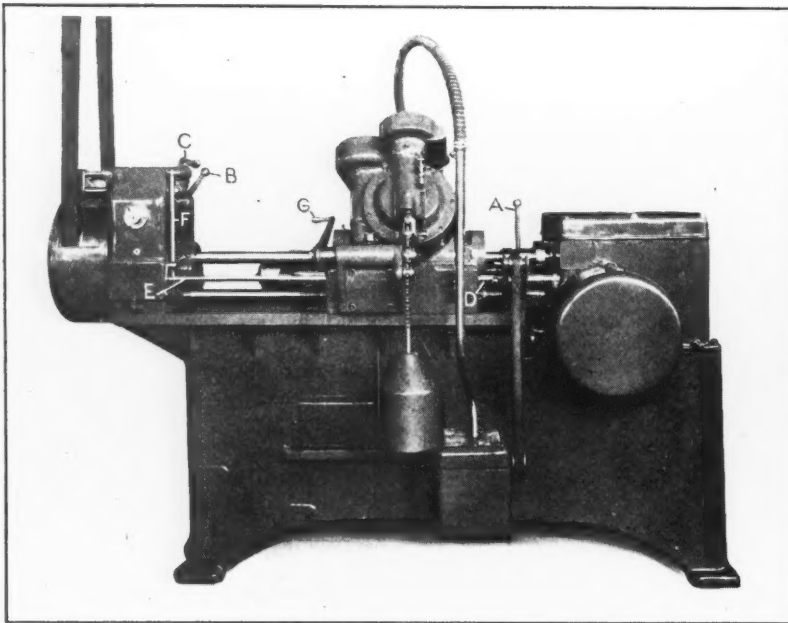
Rear View of Fellows Thread Generator, showing the Arrangement of the Quick-return Mechanism
